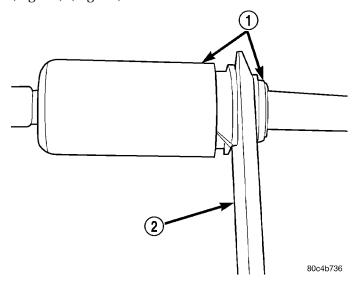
Disconnect Clutch Hydraulic Quick Connect using Tool 6638A
